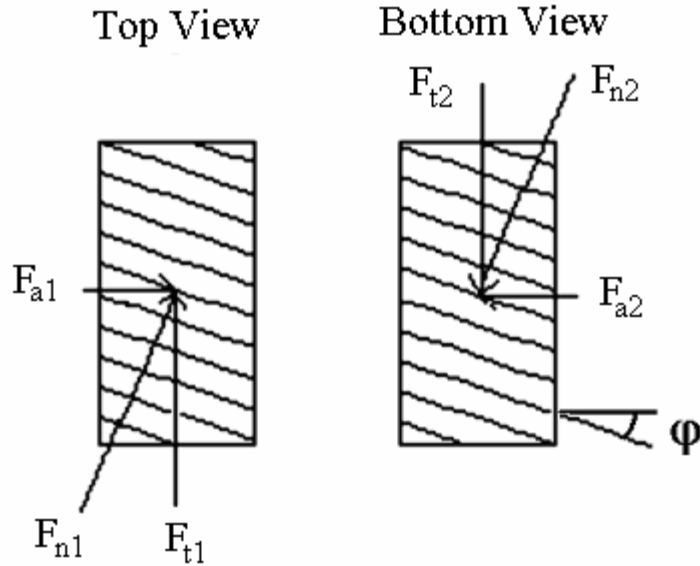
View of gear with tangential and helically induced axial forces on idler gear in transmission.
